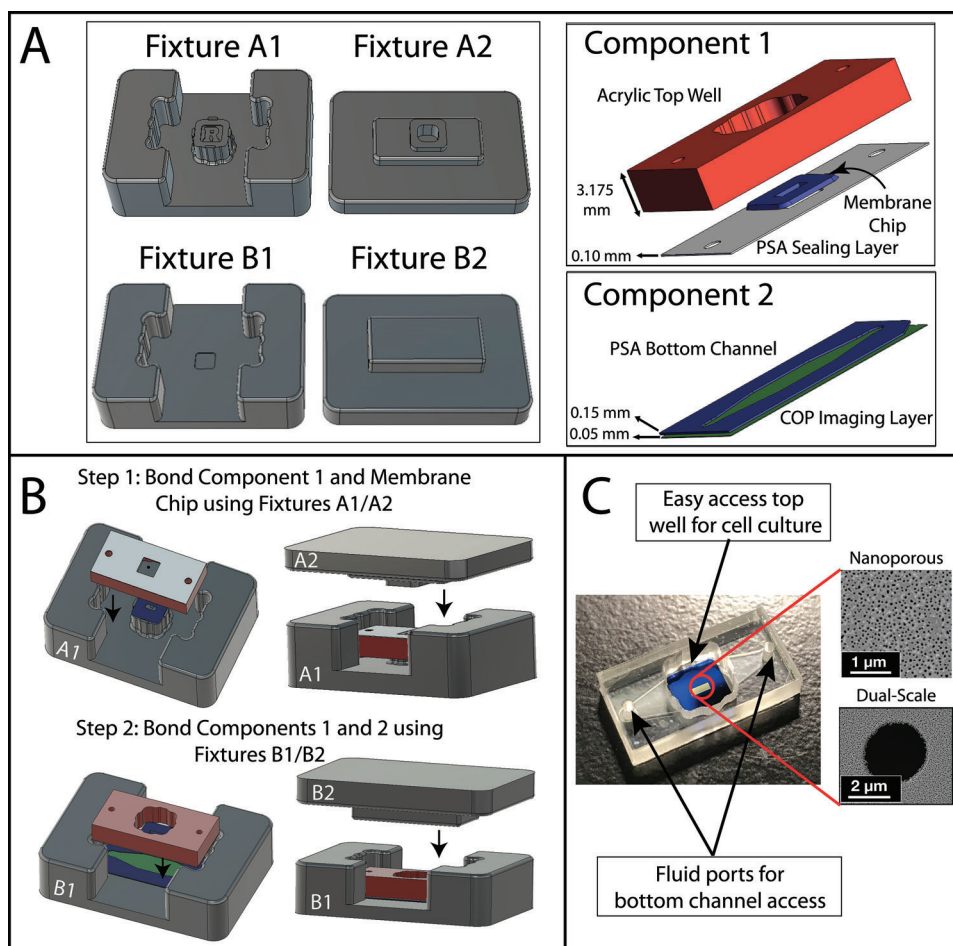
m - μ SiM assembly. A) Fixtures are used to guide components and membrane chip together (left). Fixtures A1 and A2 guide component 1 and membrane assembly, and Fixtures B1 and B2 guide component 1 and 2 assembly. Component 1 is composed of an acrylic top layer with a Transwell-style open well and a PSA sealing layer; Component 2 is composed of a thin bottom channel PSA/PET/PSA layer (“PSA Bottom Channel”) and COP imaging layer (right). B) Assembly is a two-step process. *Step 1: Bond Component 1 and Membrane Chip using Fixtures A1/A2.* Place the membrane chip on Fixture A1. Place Component 1 inverted over membrane. Use Fixture A2 to press firmly and activate PSA. This irreversibly bonds the membrane to Component 1. *Step 2: Bond Components 1 and 2 using Fixtures B1/B2.* Place Component 2 in Fixture B1, channel-side up. Place Component 1 with the membrane chip onto Component 2. Use Fixture B2 to press firmly to activate PSA, irreversibly bonding Component 1 and Component 2. C) The modular assembly allows for easy reconfiguration for the application at hand. The example here illustrates the choice of different membrane architectures. The device displayed is a “trench-down”-style device. Component 1’s open well format allows easy cell culture, and access ports provide access to the bottom channel. They are designed to seal-to-fit standard P20 and P200 pipette tips.
